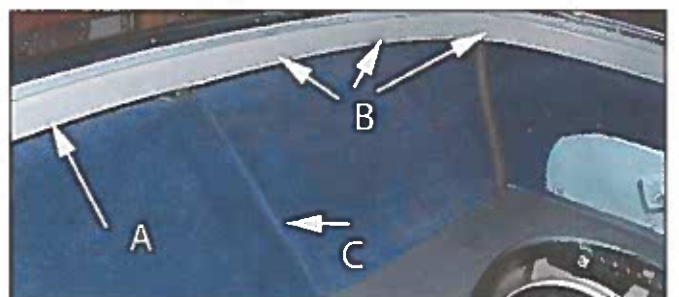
In this photo the inverted "J"-channel (A) has just been loosely placed over the front edge of the drip channel. The edge of the soft top will be clipped to the rearward-facing edge of the "J". This piece will later be attached using #6 truss-head sheet metal screws (through holes B) to the drip channel, when the top is fitted. There also is a very thin rubber strip glued to the back face of the "J"-channel (where it mates against the drip channel) to seal out water. The rear carpet covers the middle drain hose (C) on BJ8s, but runs under this hose on BJ7s.
